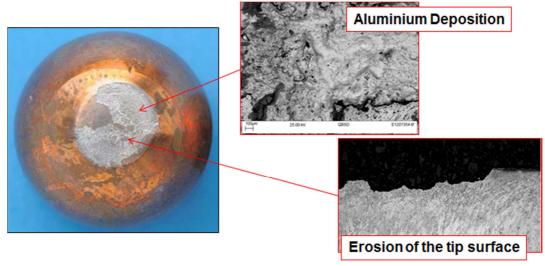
Degradation mechanisms of an electrode tip used to weld aluminium
